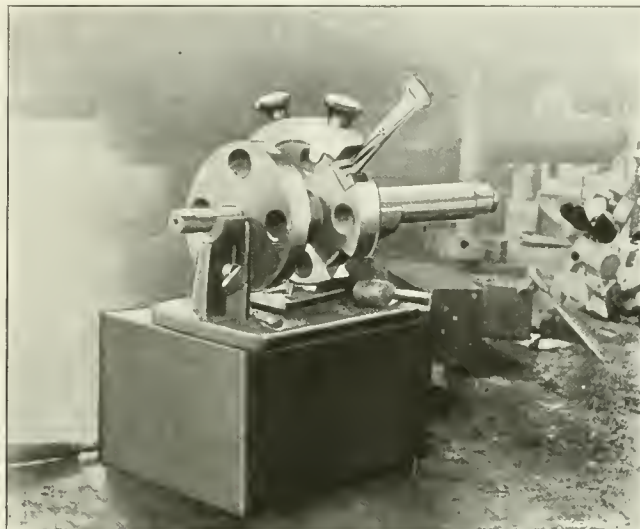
Inspecting the Location of the Locking Bolt Blocks
